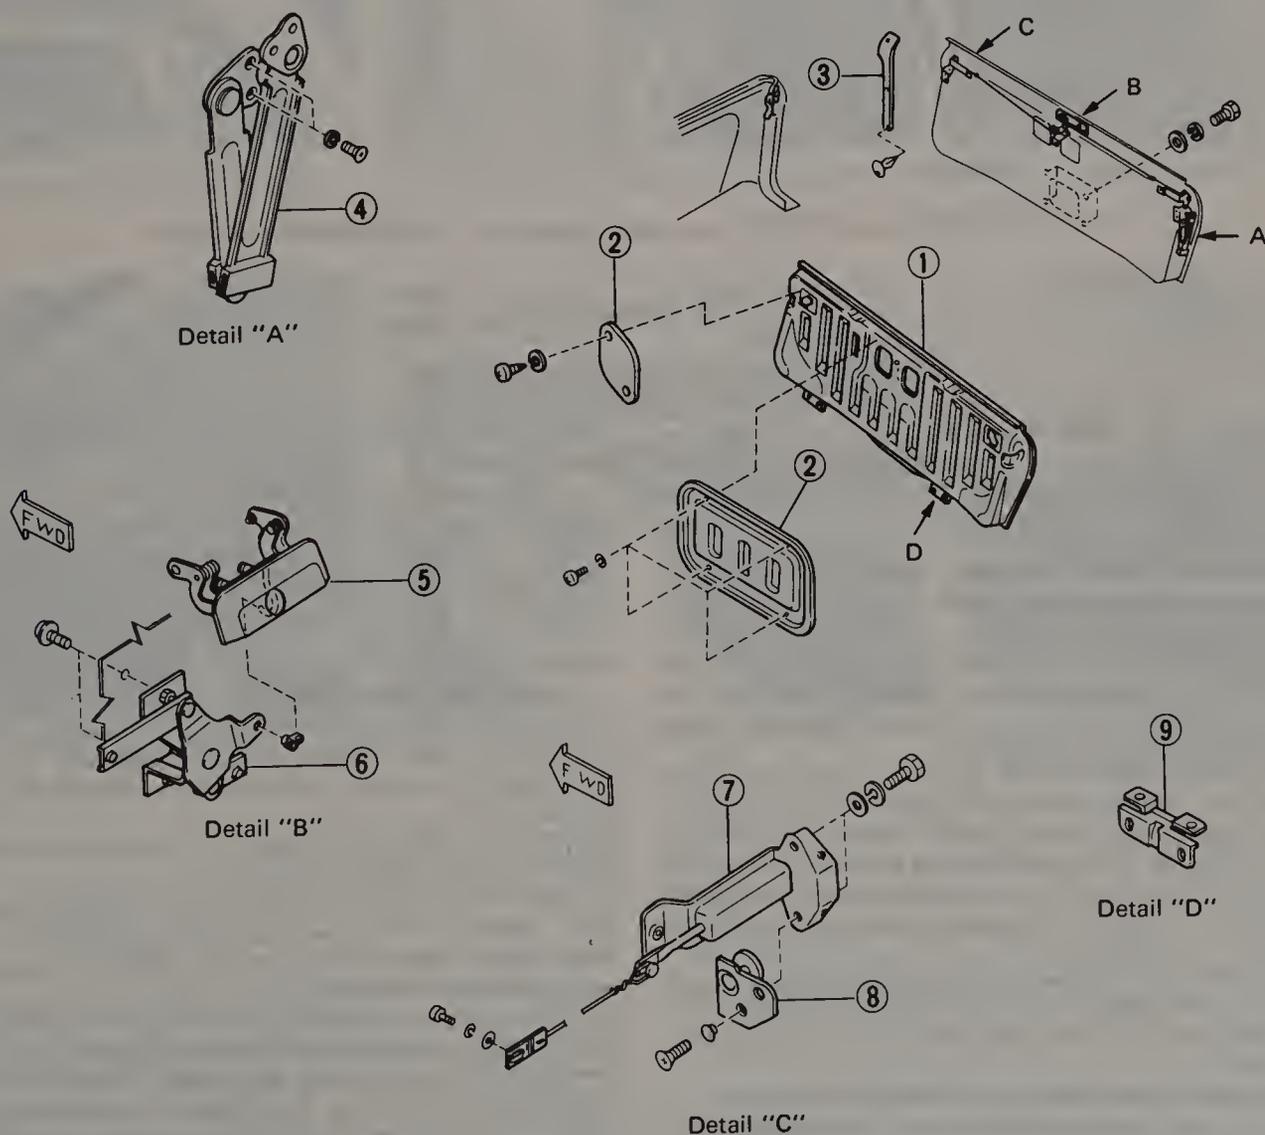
Pick-up truck (1982) rear gate components – exploded view (Sec 15)
